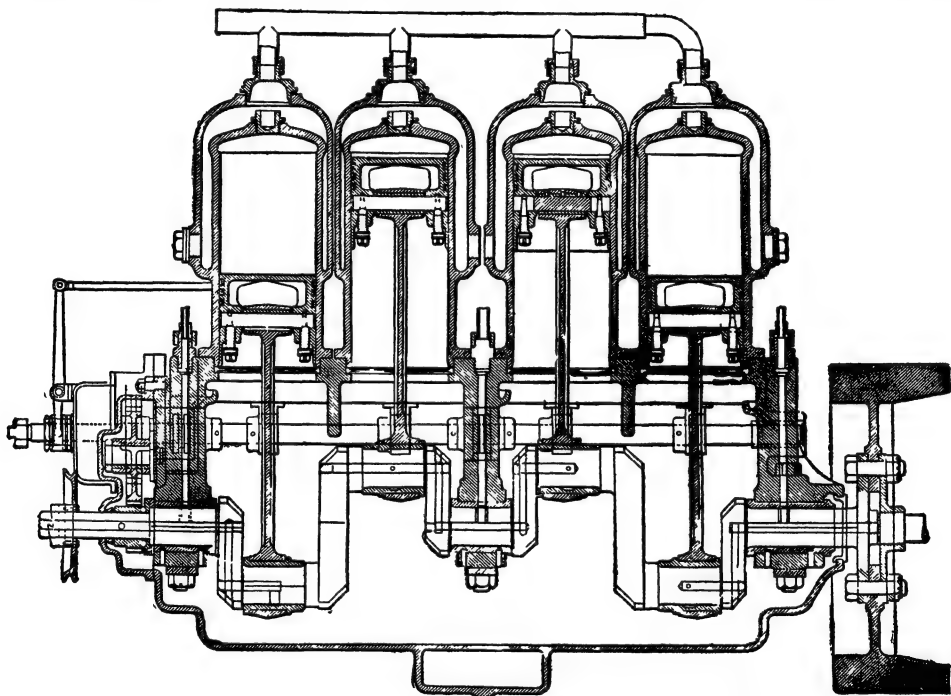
LONGITUDINAL SECTION THROUGH FOUR-CYLINDER MOTOR AND FLYWHEEL CLUTCH.
